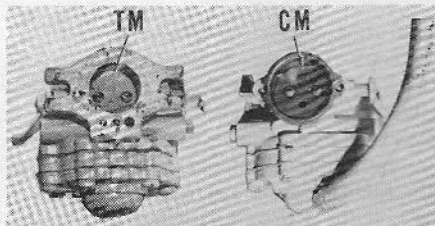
A—Punch marks on throttle (TM) and choke (CM) plates should be toward top and outside of carburetors.
